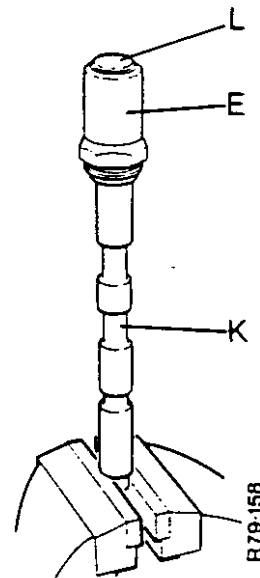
DISASSEMBLY OF THE THROW-OUT MECHANISM
